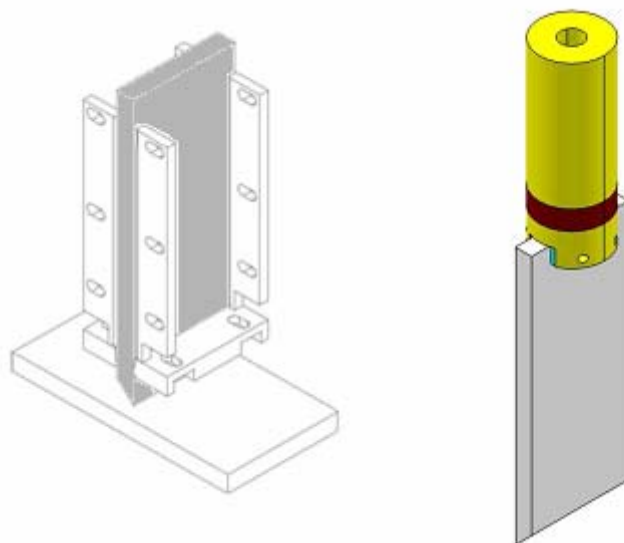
The specimen mounted on the stabilizing assembly (left) and the specimen fixed on the cylinder containing the load cell (right).
